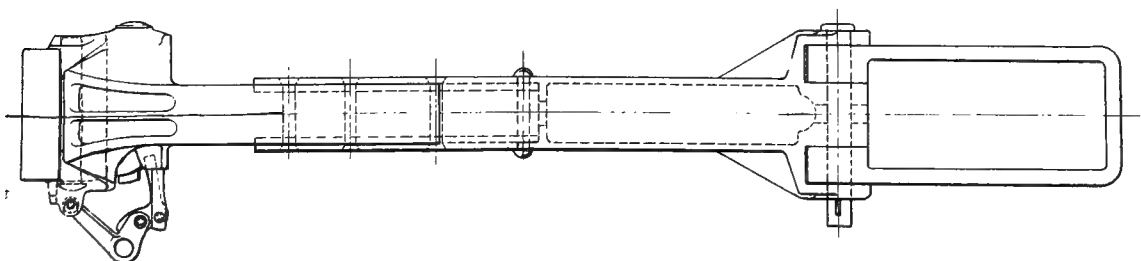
Cast Steel Extended Shank and Yoke Connection for Quadruple Shear Pivot Pin. National Malleable Castings Company.
